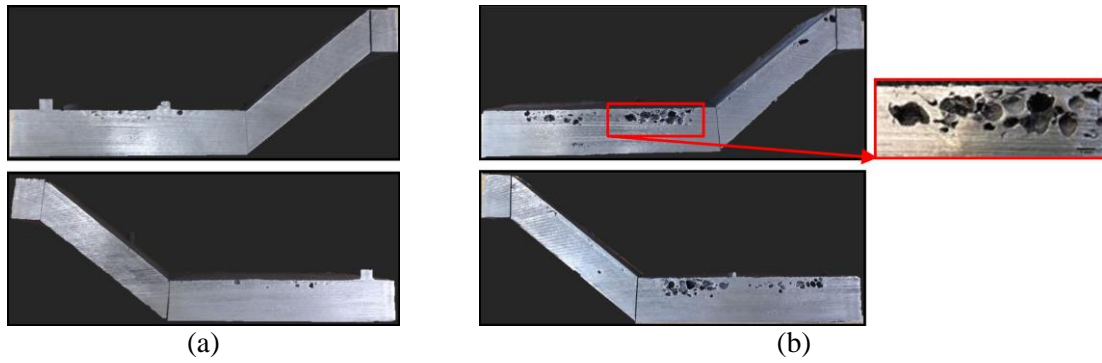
Mid-plane views of castings with inclined surface (a) Casting poured at higher pouring temperature, and (b) casting poured at lower pouring temperature. Castings are poured from the same heat (Heat #3).
